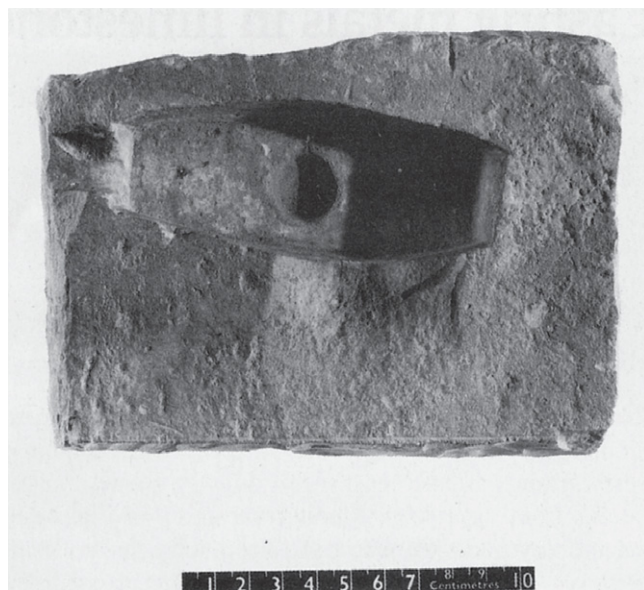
Limestone mould for casting a socketed hammer. The circular depression in the bottom of the mould would have held in position a clay rod to form the socket space in the casting.
